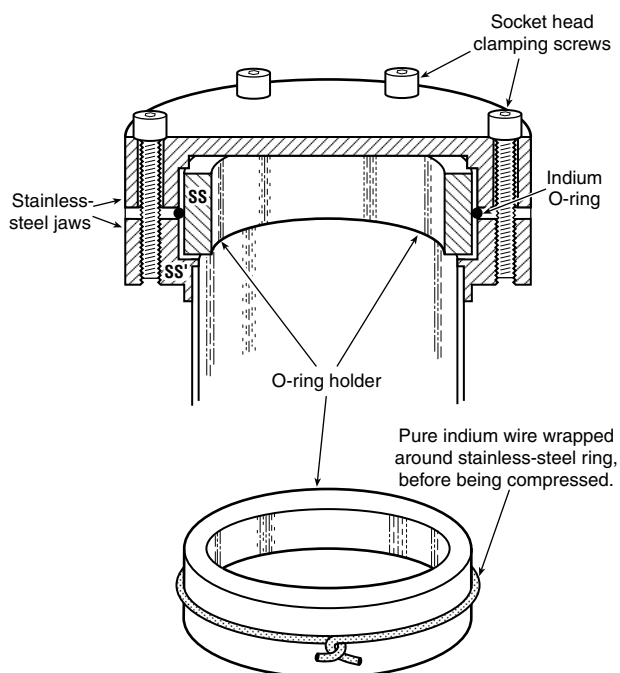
Cut-away view of indium O-ring cryogenic vacuum compression seal. The O-ring is formed by wrapping pure indium wire around the stainless-steel ring; the ring is then placed in the apparatus and the O-ring is squashed by bolting together the two stainless-steel jaws.
